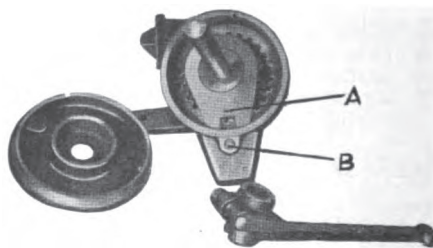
Brush steering gear made irreversible by an eccentric motion, and consists of a spur and an internal gear.
